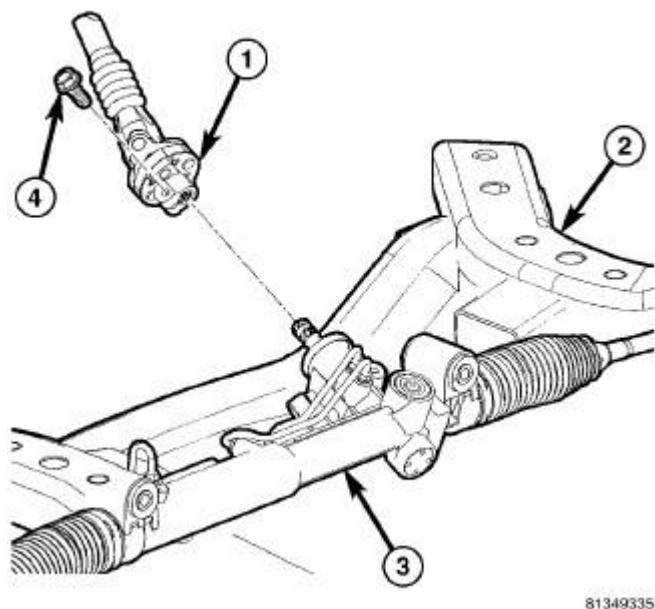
Identifying Steering Coupler Bolt, Coupler & Rack
